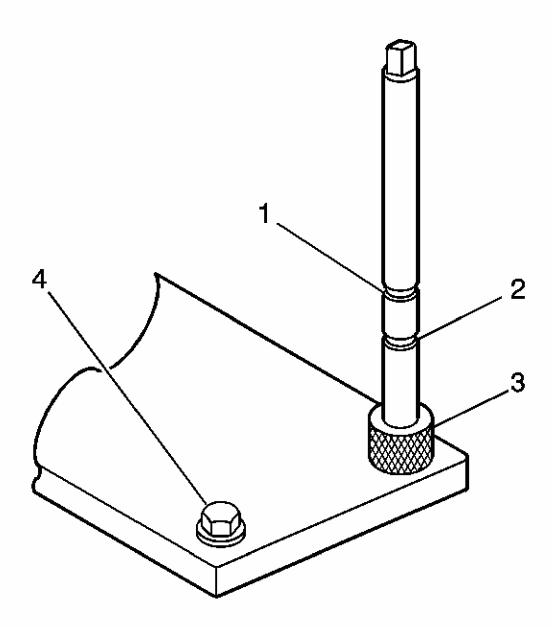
Rotating Tap Into Cylinder Head Bolt Hole Courtesy of GENERAL MOTORS CORP.
